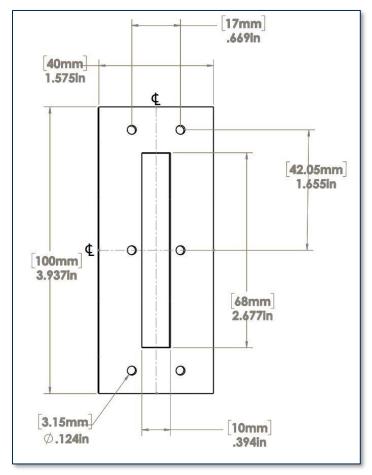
mDynamo Weatherized Panel Cutout Dimensions in [mm] inches.
